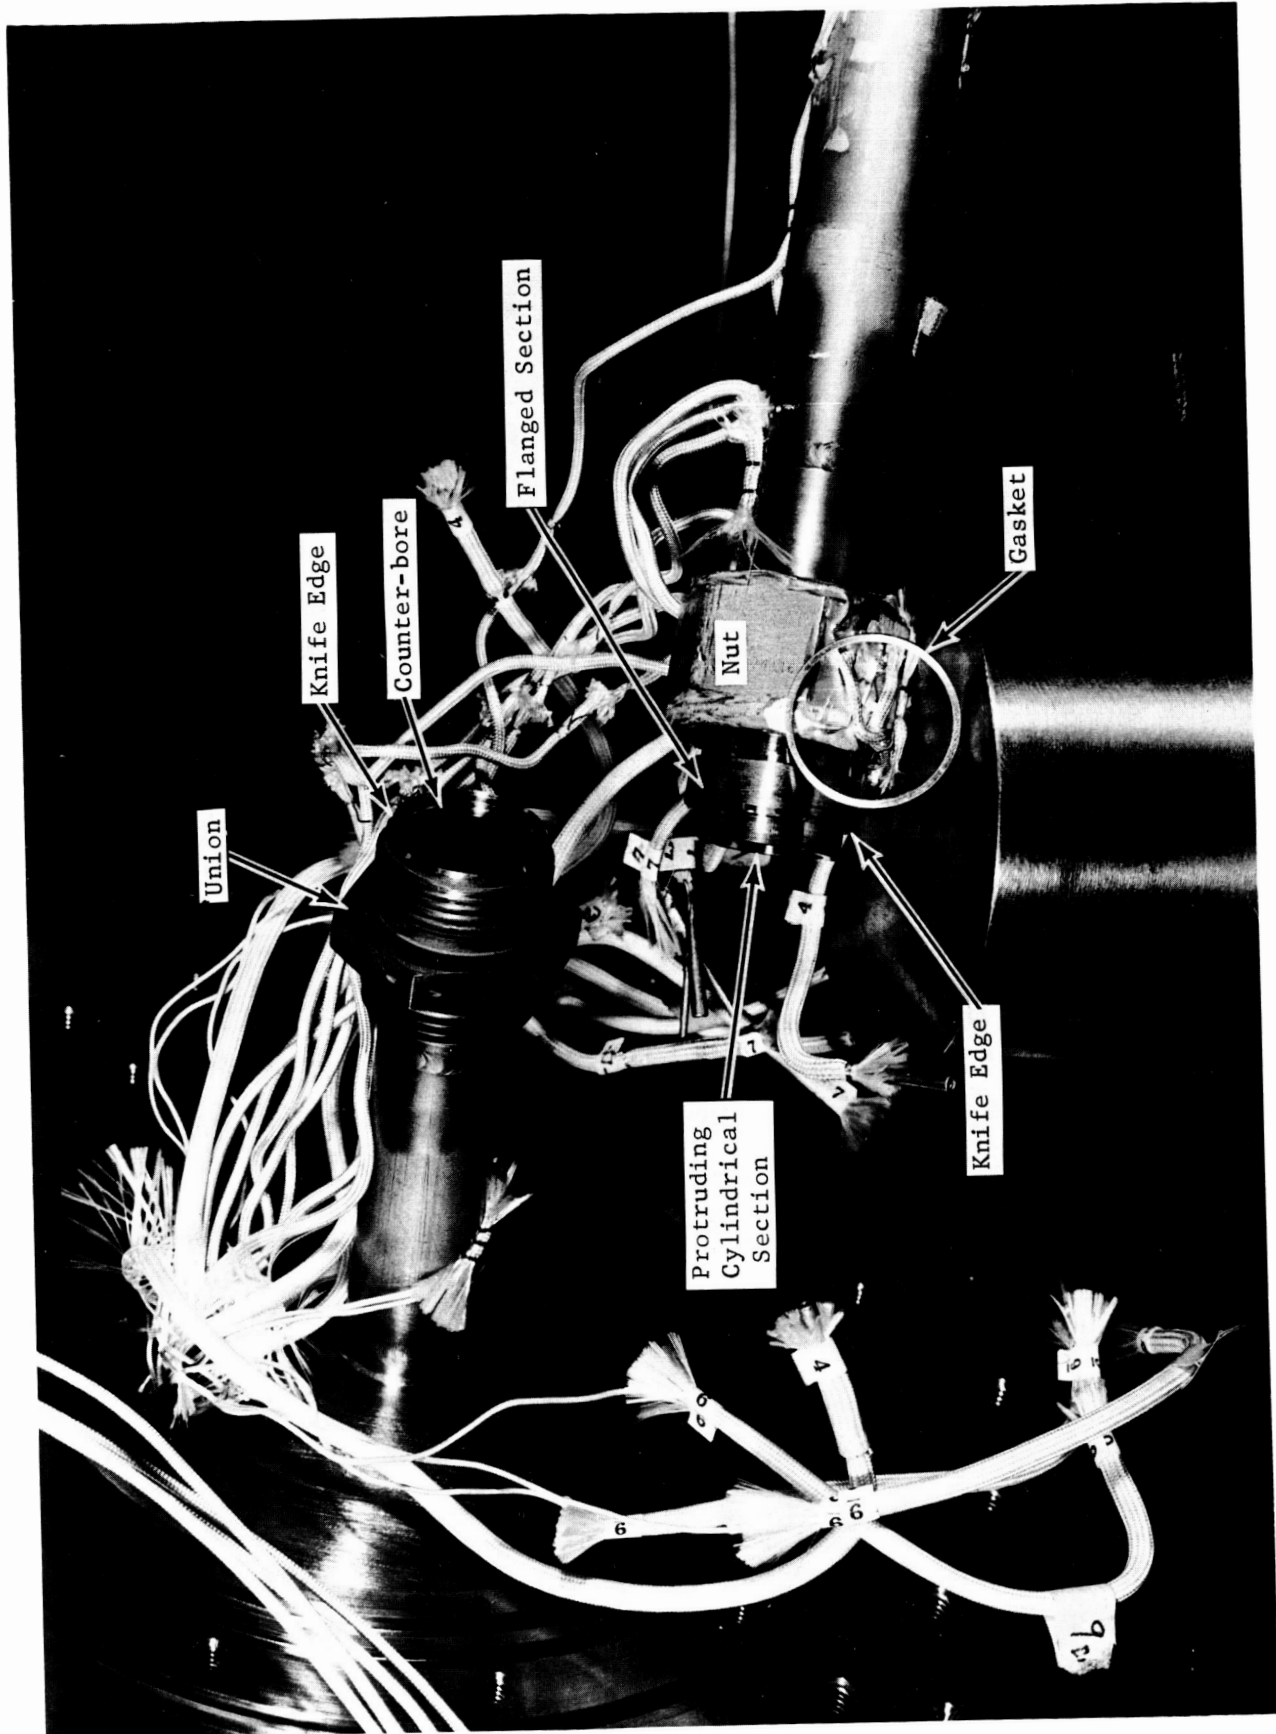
WELDED FLANGED CONNECTOR
